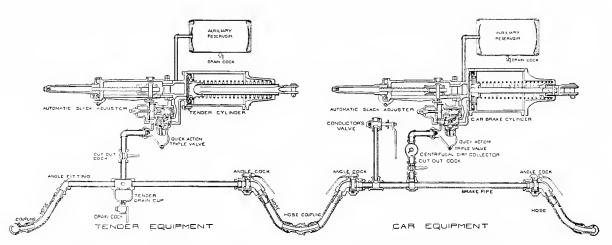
Diagram of Westinghouse Old Standard Quick Action Air Brake Apparatus for Passenger Train Cars.
